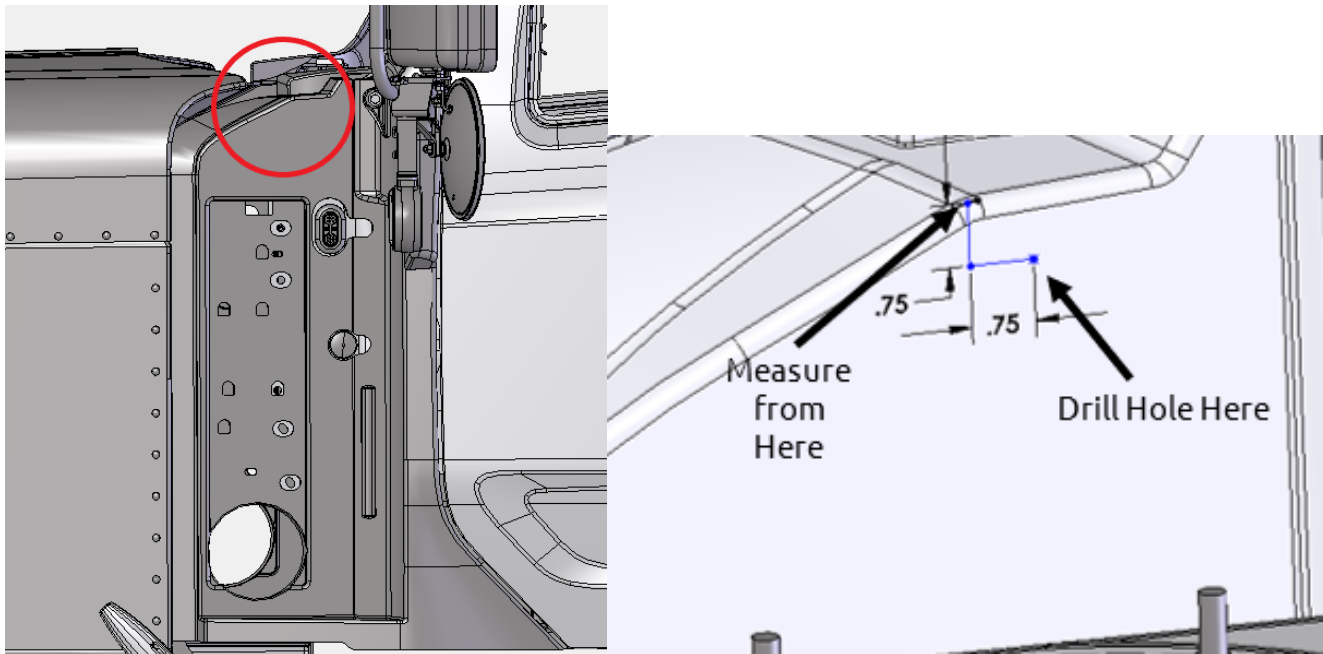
Where to Drill for Wiring Harness to be Run (Driver Side Shown)
